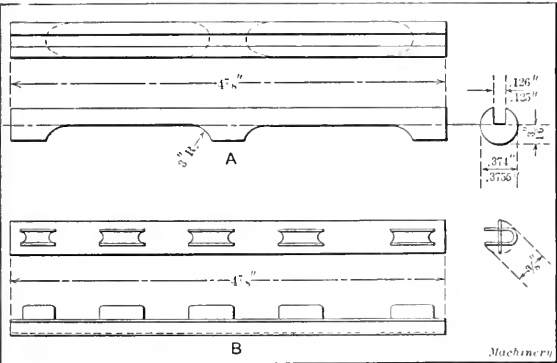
(A) Slotted Rod for Hollow Shaft shown at A, Fig. 1; (B) New Method of producing Part to replace Solid Rod A
